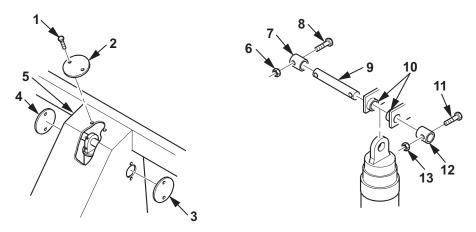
Access Covers and Hoist Cylinder Pin Removal.
